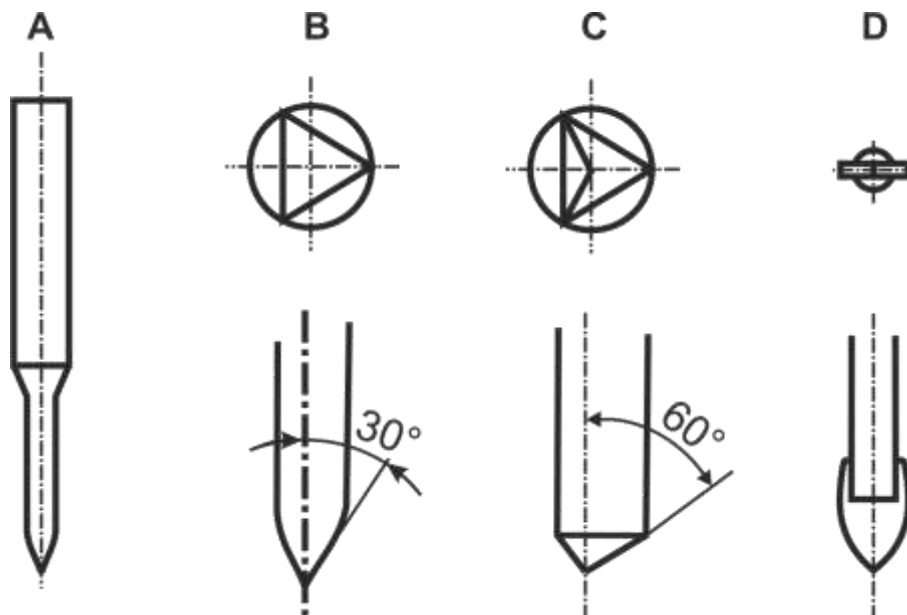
Shape of flat bottom drill bits: A - general view, B - drill bit for drilling of small thickness, C - for drilling of large thickness, D - drill bit with insert
